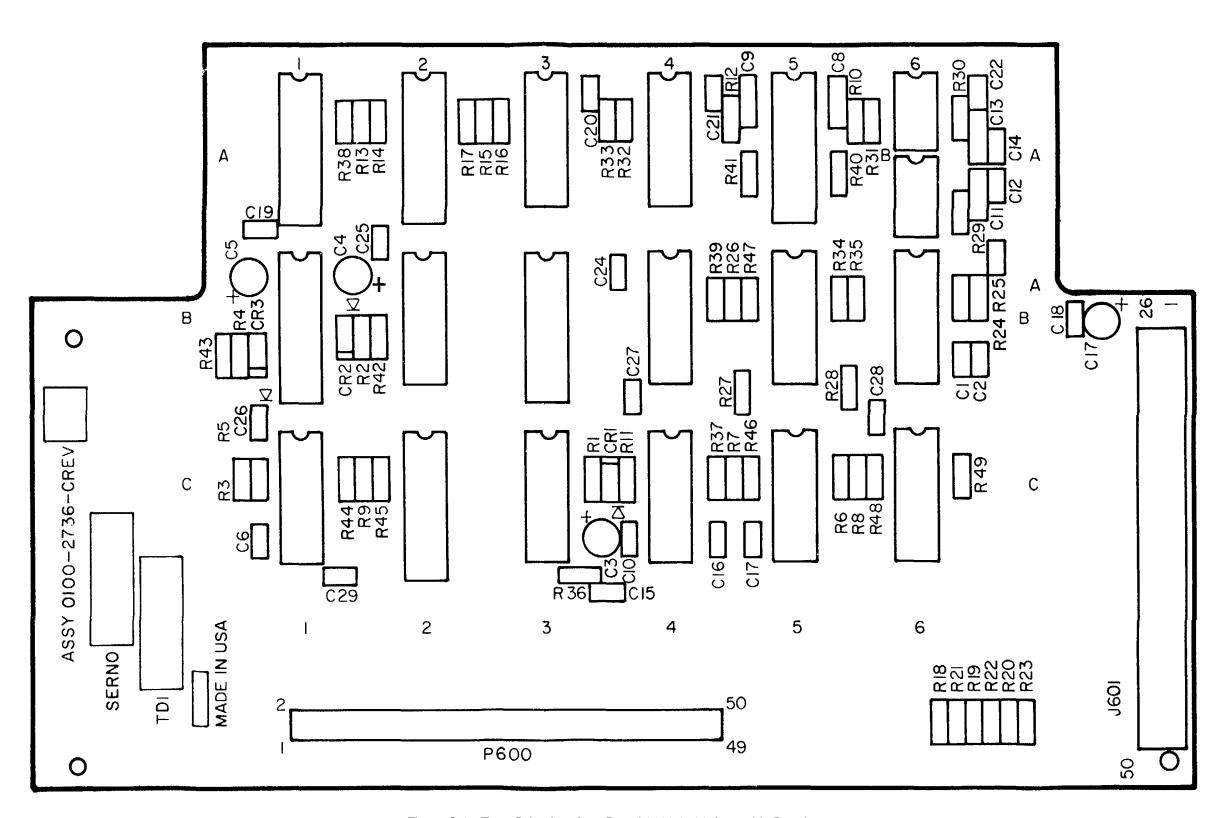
Tape Drive Interface Board 0100-2736 Assembly Drawing
